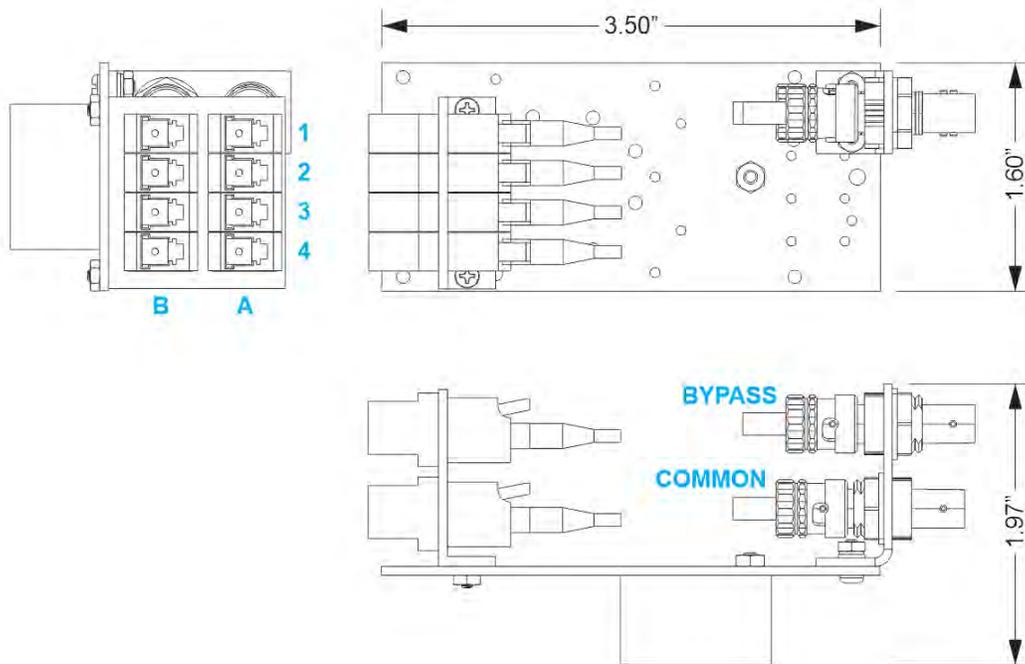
914-CWDM-8R, 8-Channel CWDM Optics Card, Assembly 914-0017-21
